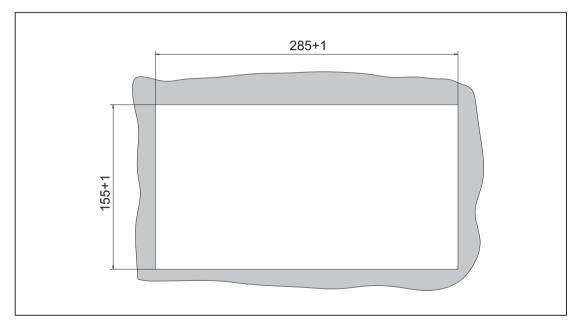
Panel cutout for CNC full keyboard KB 310C (plate thickness 1.5 - 6.0 mm)
